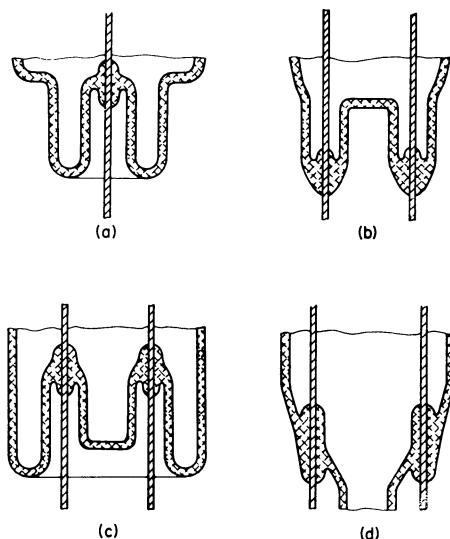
Rod seals: (a) single rod; (b) double rod seal in external extensions; (c) as (b) but internal; (d) double rod seal through the wall of the device
